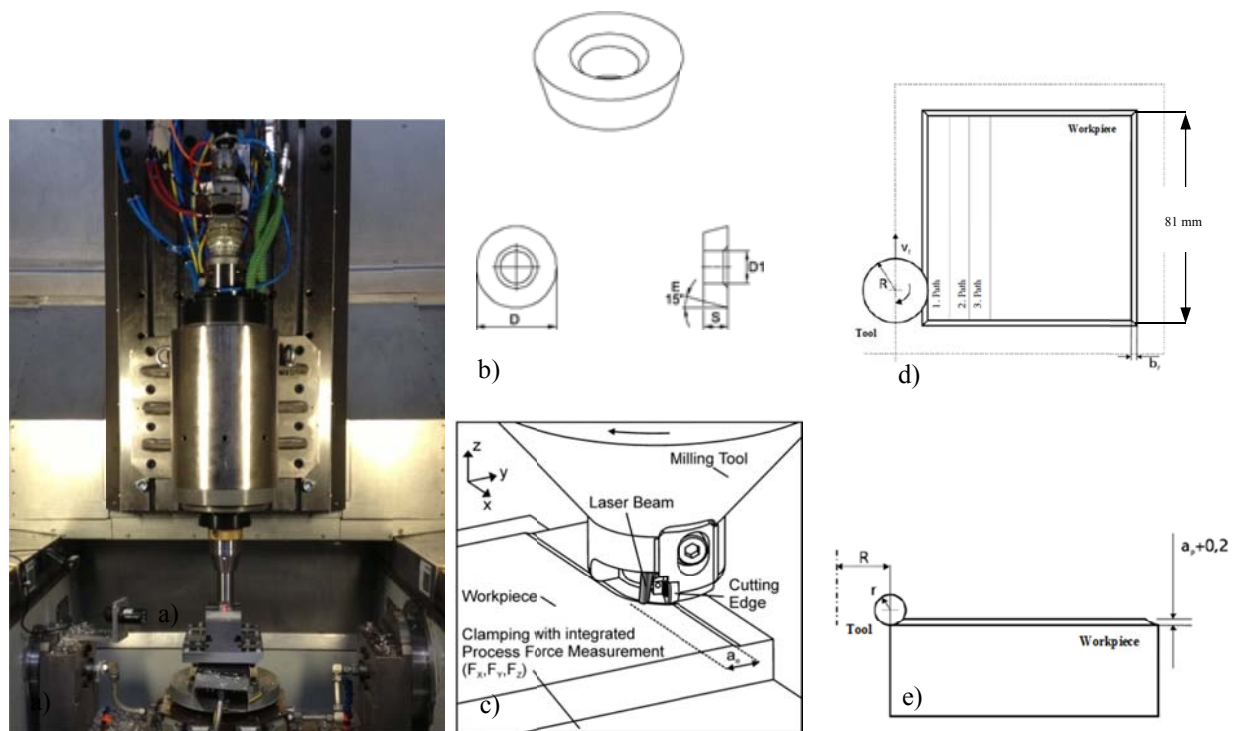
Experimental setup (a) aggregate laser assisted side milling-ToolLAM, (b) cutting insert geometry, (c) x, y, z coordination, (d) work piece geometry and milling paths and (e) side view [51, 67, 70].
